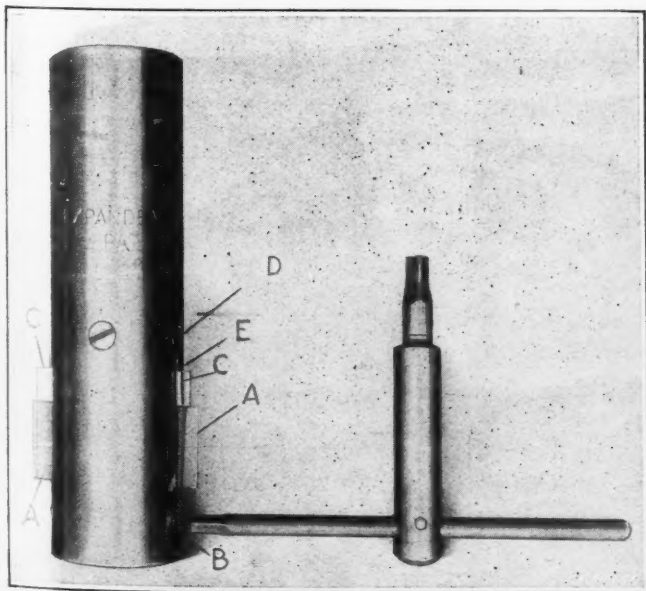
Adjustable Boring Tool made by the Expandem Tool & Mfg. Co. The Key is shown in Position for adjusting Cutters
